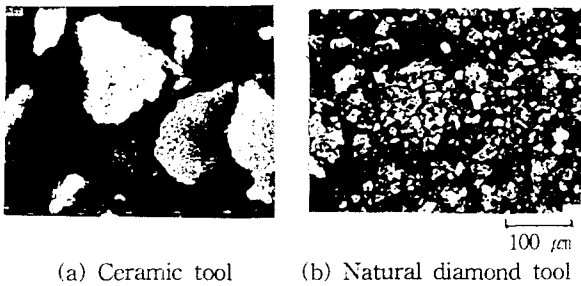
Shapes of chips in machining of the pre-sintered ceramics with ceramic tool and diamond tool
